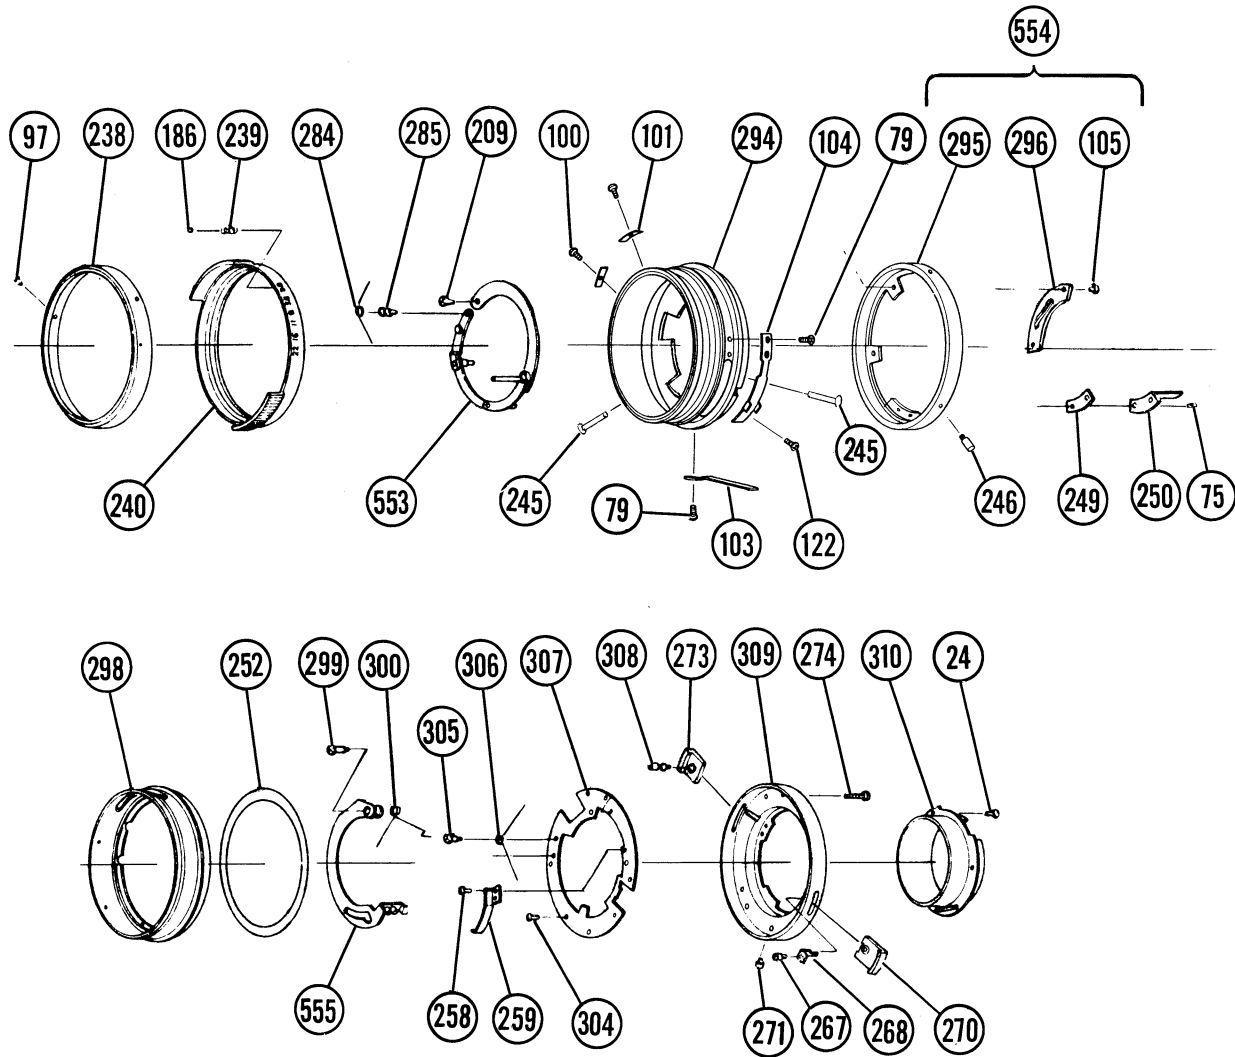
Mount Assembly, Olympus (Ref. 557, Pg 58)
